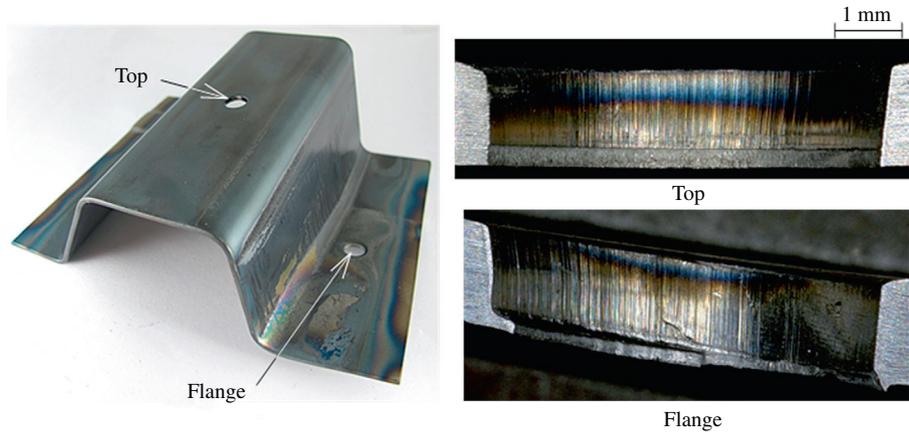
Cross-sections and surfaces of bottom and flange holes after cold scrap removing.
